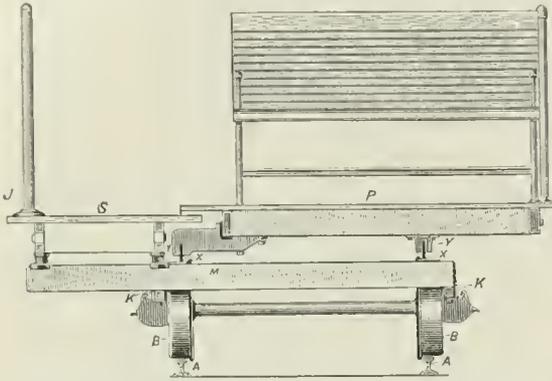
End view, showing both platforms: A, track-rails; B, wheels; J, hand-post; K, boxes; M, transverse frame of slow-moving platform; P, fast platform; S, slow platform; X, traveling flexible rail; Y, castings with slots for flexible rail.
